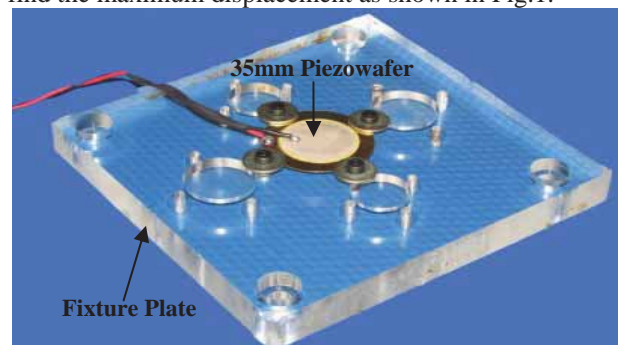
Fixture to find the displacement of 35mm diameter piezowafer
